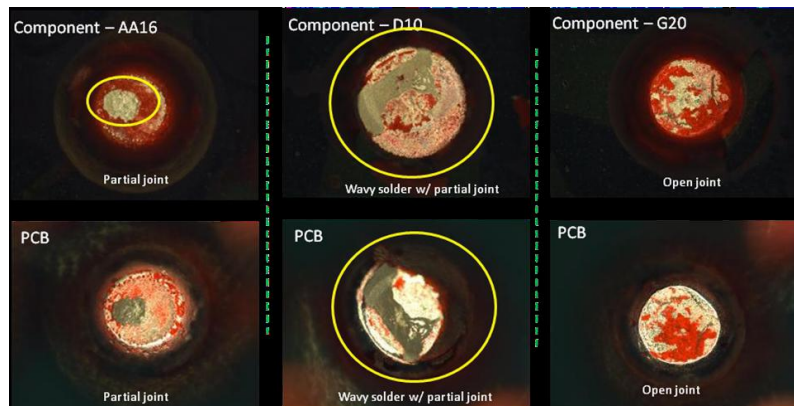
Optical photomicrographs of various fracture surfaces after DnP testing.
